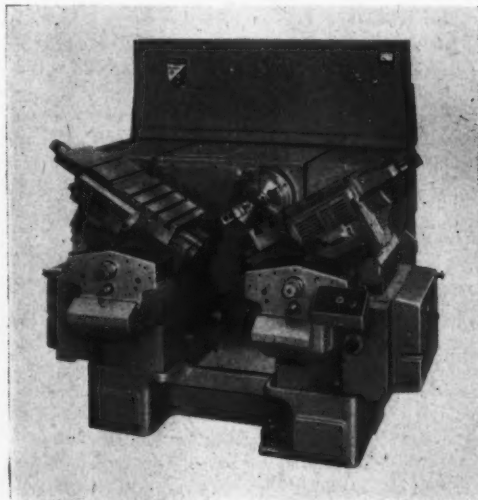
Frontor 40 single-spindle chucking automatic for turning up to  $19\frac{1}{4}$  in. diameter
